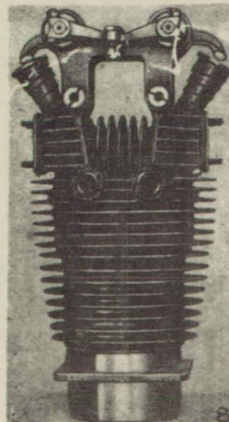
Experimental cylinder like Fig. 8, but without fin sleeve (Fig.9)
